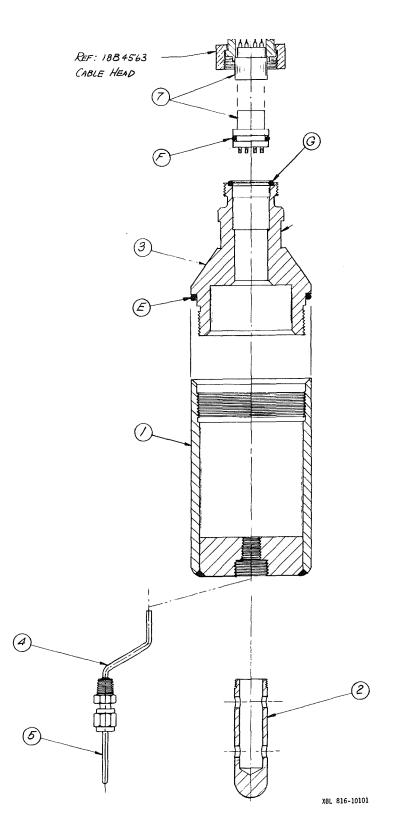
Assembly drawing for the downhole pressure and temperature instrumentation.
